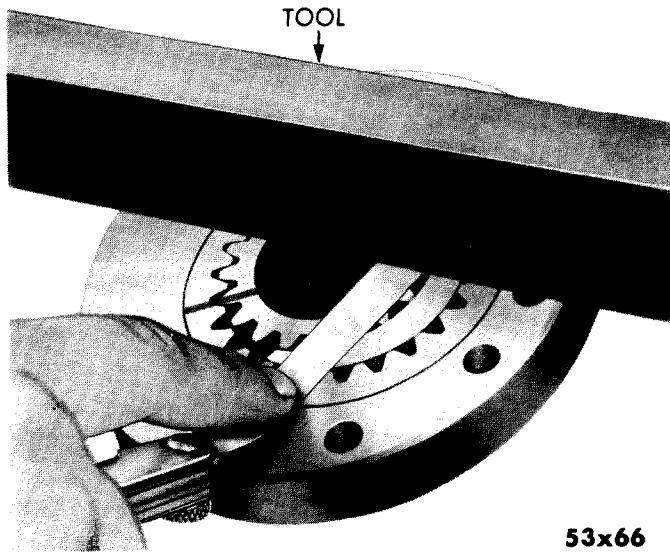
Checking Clearance Between Rear Pump Body and Gears
